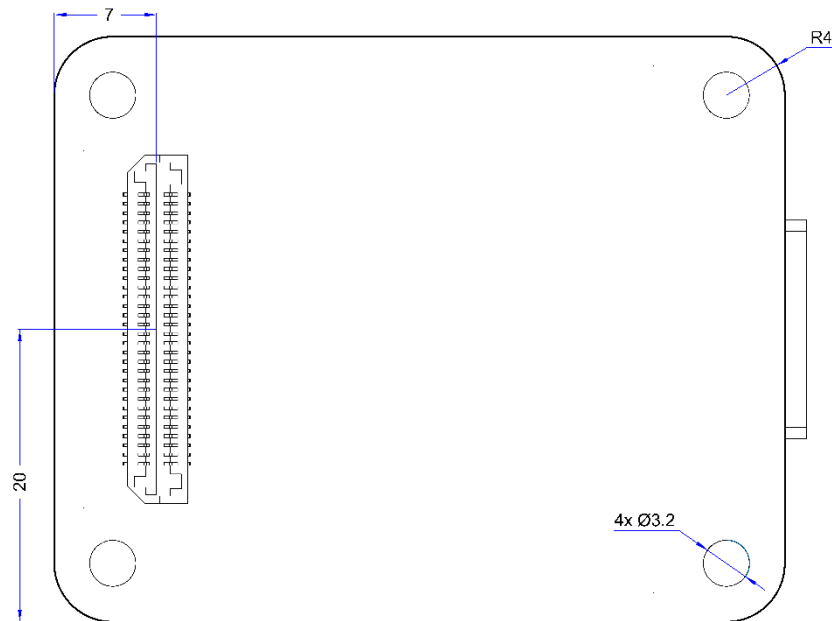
Verdin DSI to HDMI Adapter Dimensions in mm (bottom side, bottom view)
